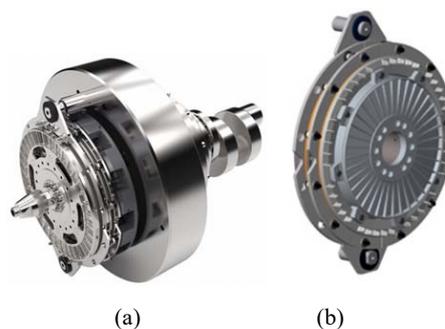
(a) Industrial clutch plus flywheel, (b) industrial clutch [19]
